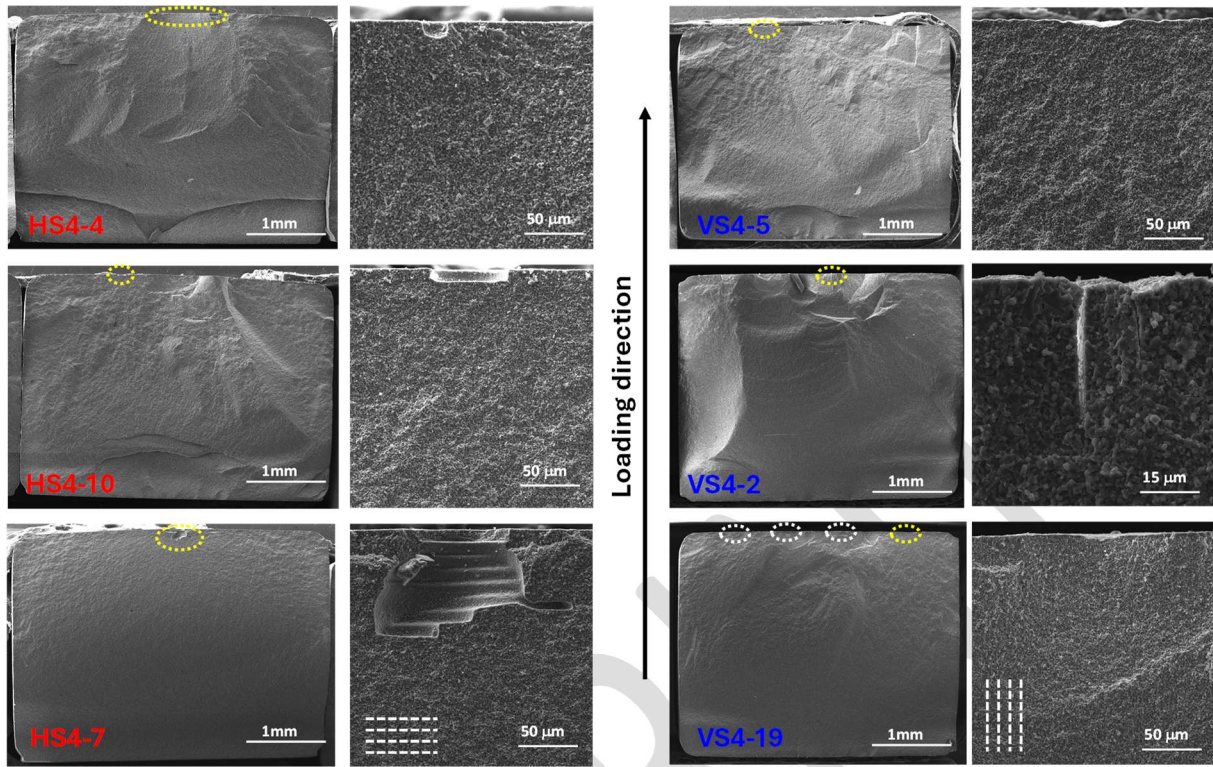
Examples of fracture surfaces of selected horizontally (left) and vertically (right) printed specimens. Fracture origins: HS4-4 – surface round pore, HS4-10 – large “disc-shaped” pore with thickness of one layer, HS4-7 – large pore „wormhole” through several layers, VS4-5 – surface valley, VS4-2 – surface interlayer crack, and VS4-19 – multiple surface flows. The yellow ellipse indicates the initiation site, which is shown in detail.
